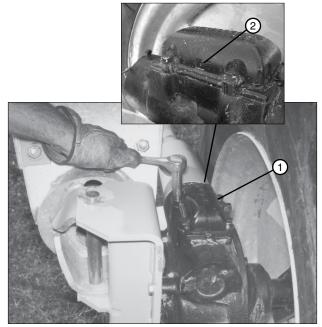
1. Expansion Chamber Cap 2. Vent Hole
